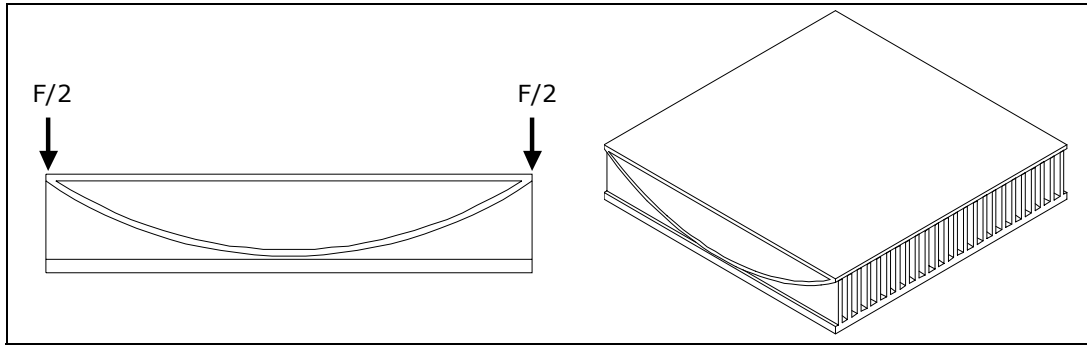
end plate based on Dbow-concept, head plate, schematic view
